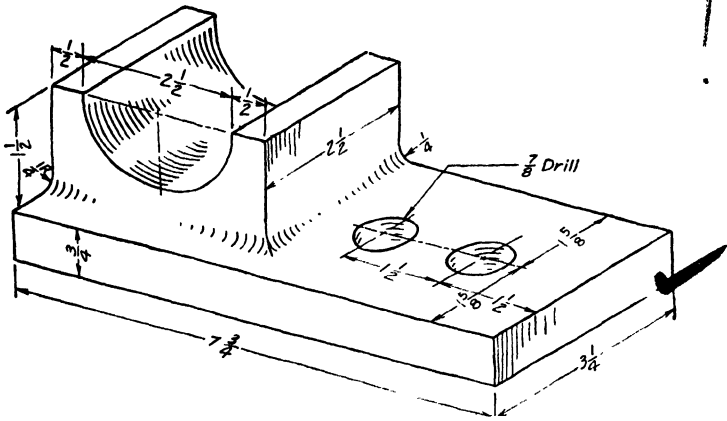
Prob. 122. Draw three views of the horizontal guide.
